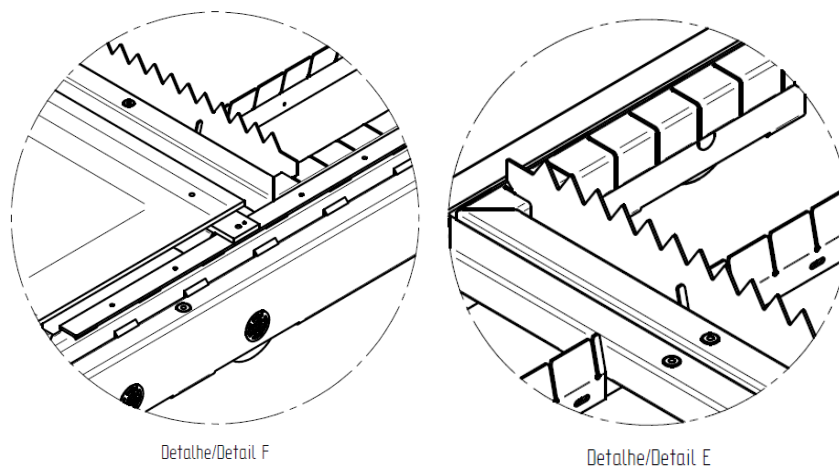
Detail F (LMD crossbar and work area assembly); Detail E (slat assembly).
